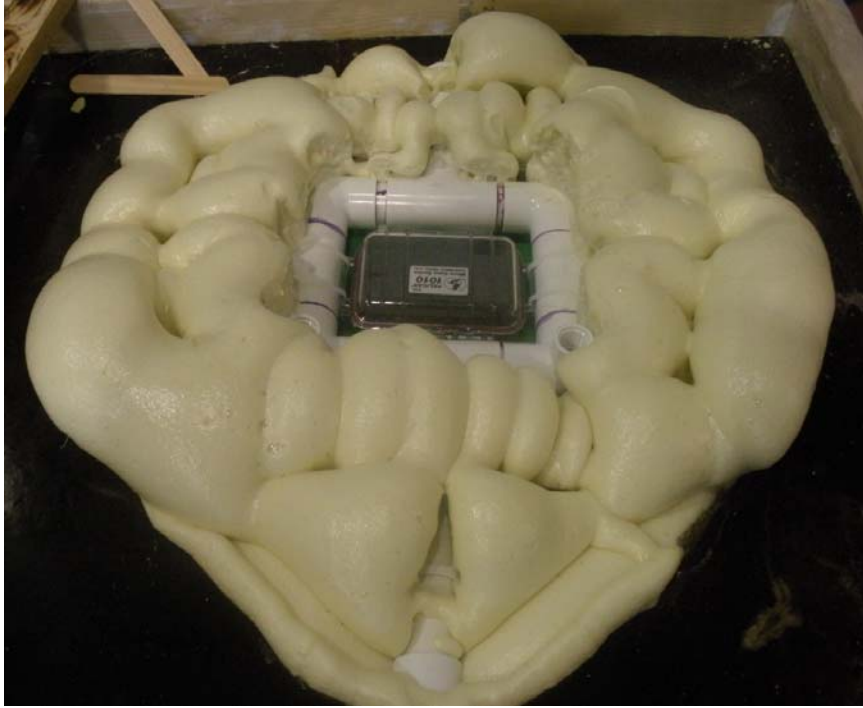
Board, PVC frame, and weights resting on shell in mold after pouring the foam for the body.
